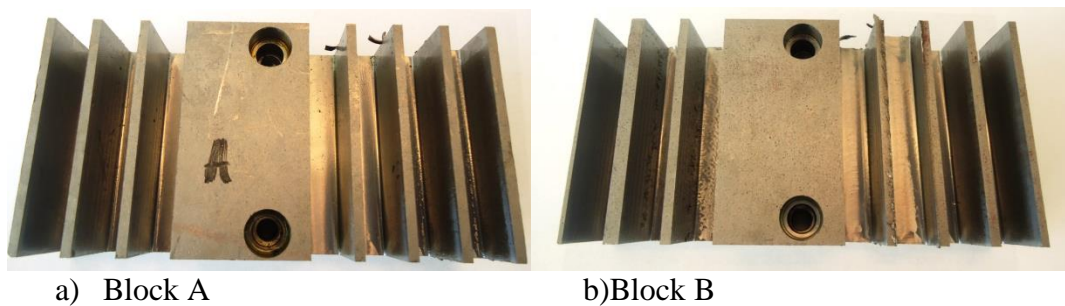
PHOTOGRAPHS OF MACHINED BLOCKS: A) USING EMULSION COOLING AND MQL (BLOCK A), B) USING CRYOGENIC COOLING (BLOCK B)
